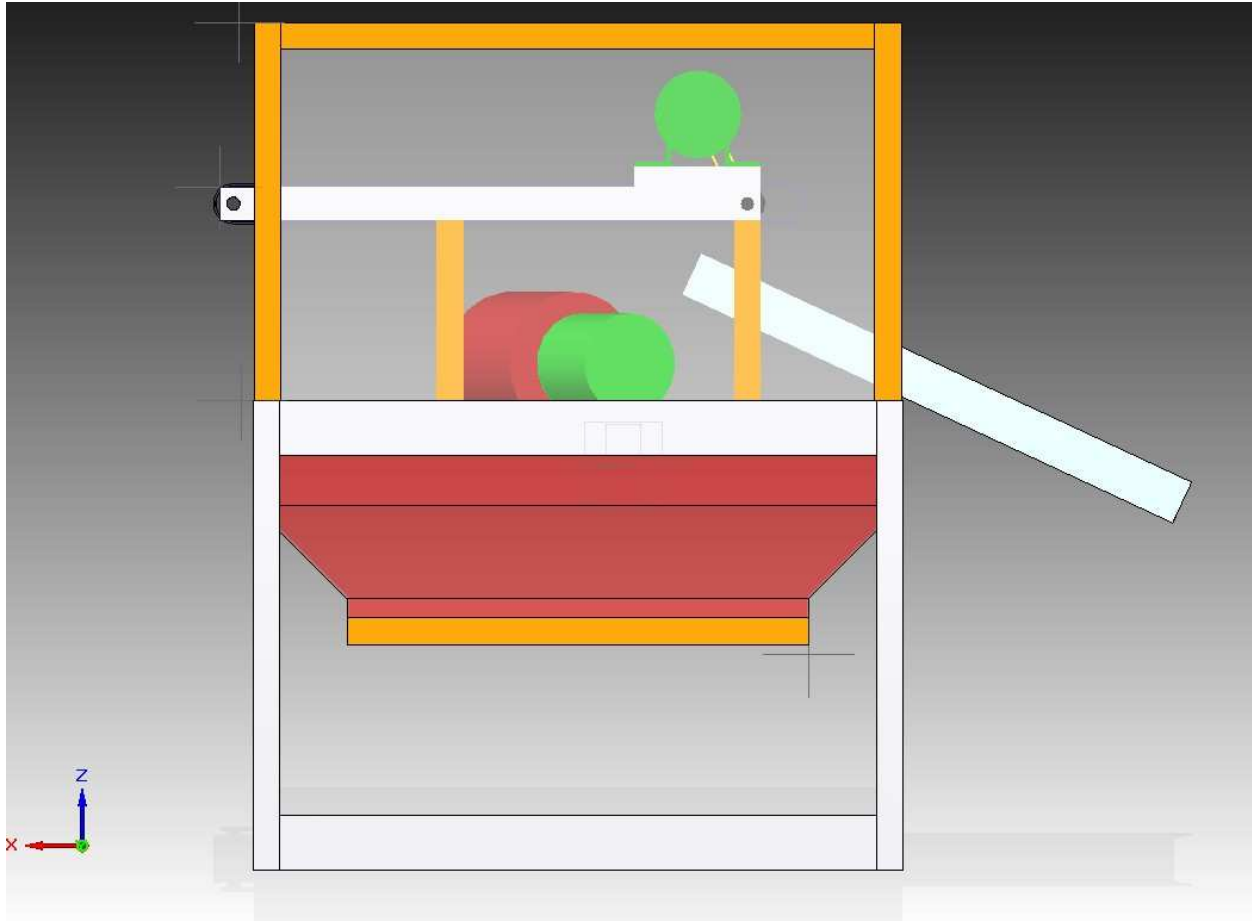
Side view of final assembly (Green = Motors, Red = Brush)
